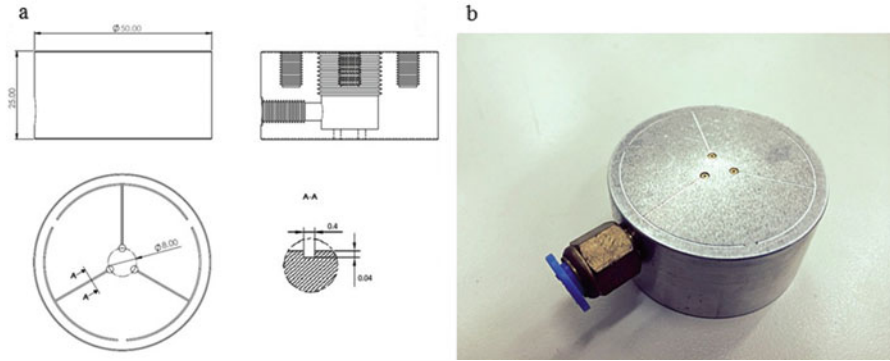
The developed aerostatic bearing, (a) geometry and dimension, (b) real picture
